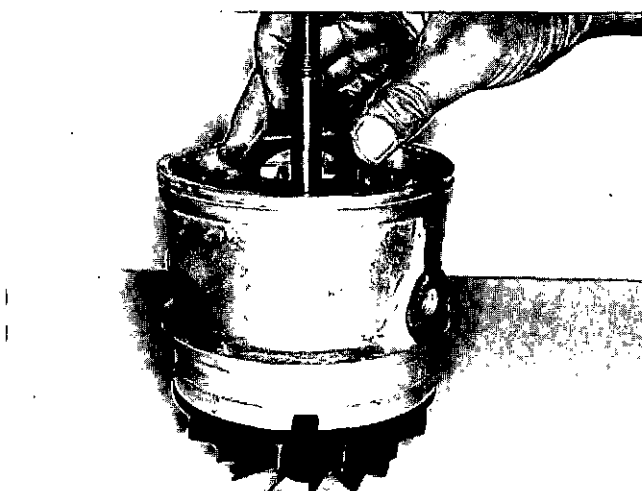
, (VTST39). Installing the turbocharger bearing insert
